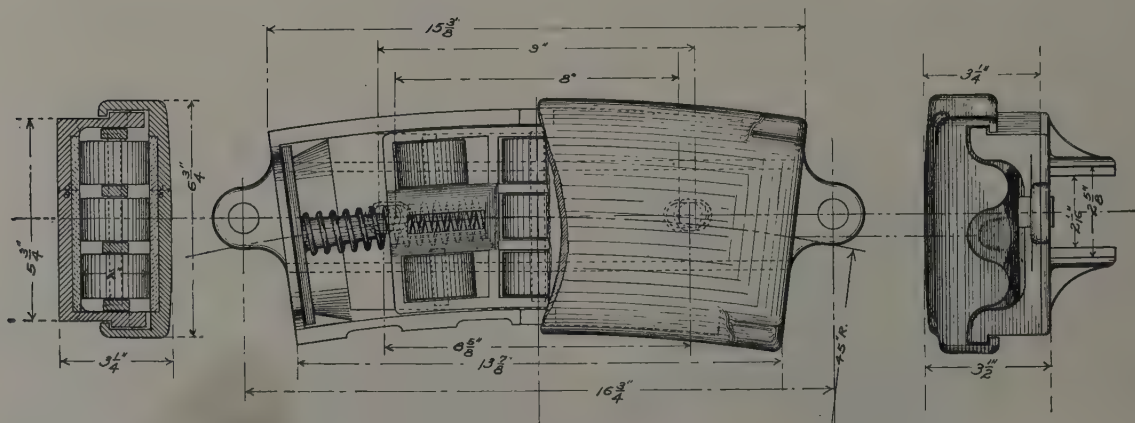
Perry No. 10 Passenger Car Side Bearing. For Six-Wheel Trucks.
